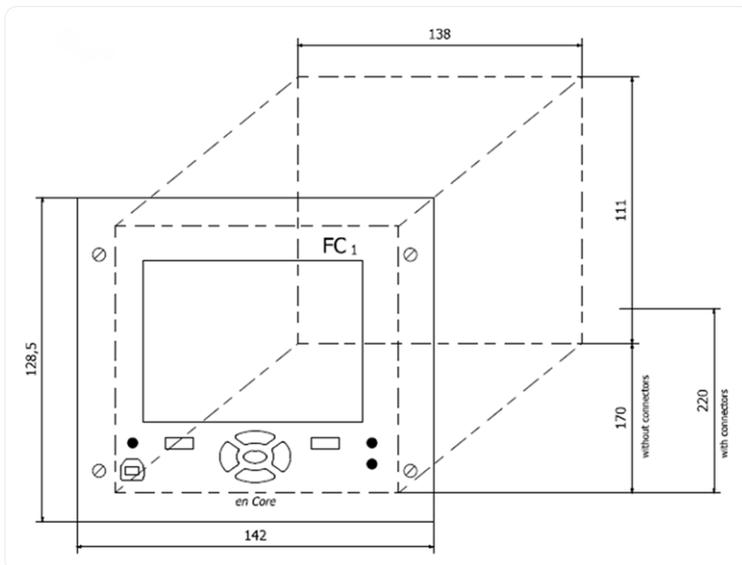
Dimensions for plug-in module 19", 3 U, 28 HP
